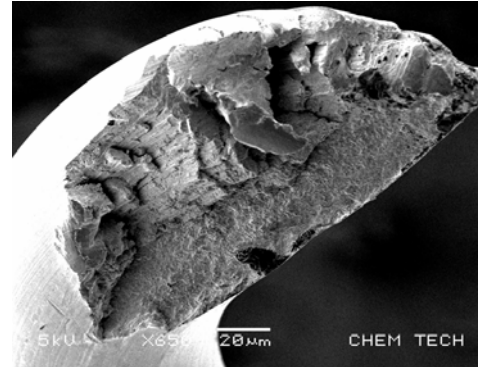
Fracture surface of a wire in coil failed at 2×10^6 cycles. Multiaxial stresses cause fracture surface like a curved surface.
